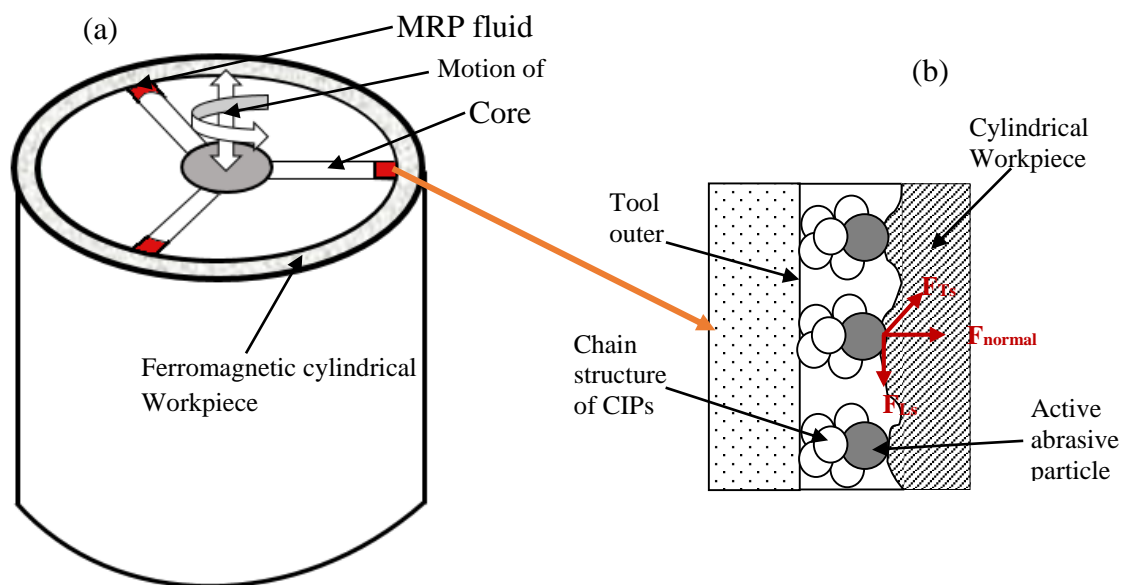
(a) Schematic of magnetorheological (MR) honing tool during finishing the internal surface of workpiece and (b) enlarged view of interaction of SiC abrasive particle and workpiece surface
